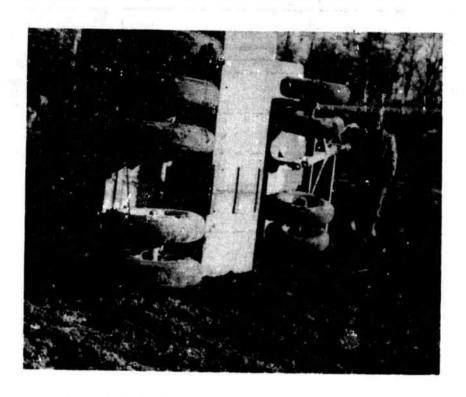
ROLLER BODY WELDED AND REASSEMBLED
